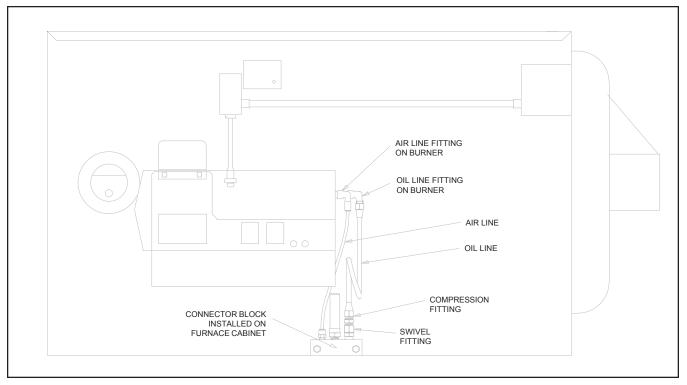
M - Installation of Connector Block, Oil Line and Air Line (Front View)
